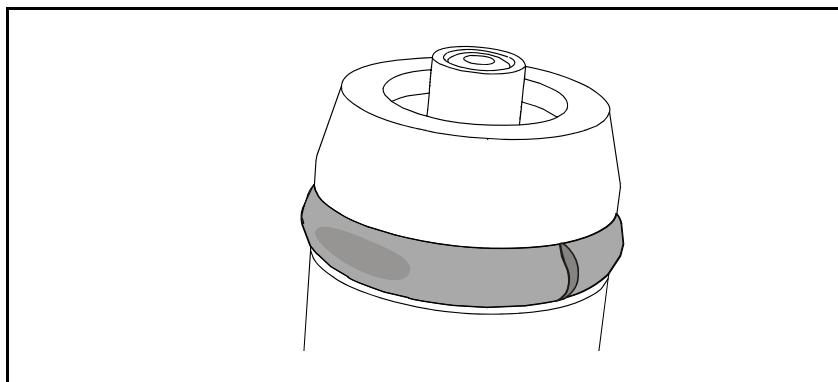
Cracks and abrasion on O-ring.
